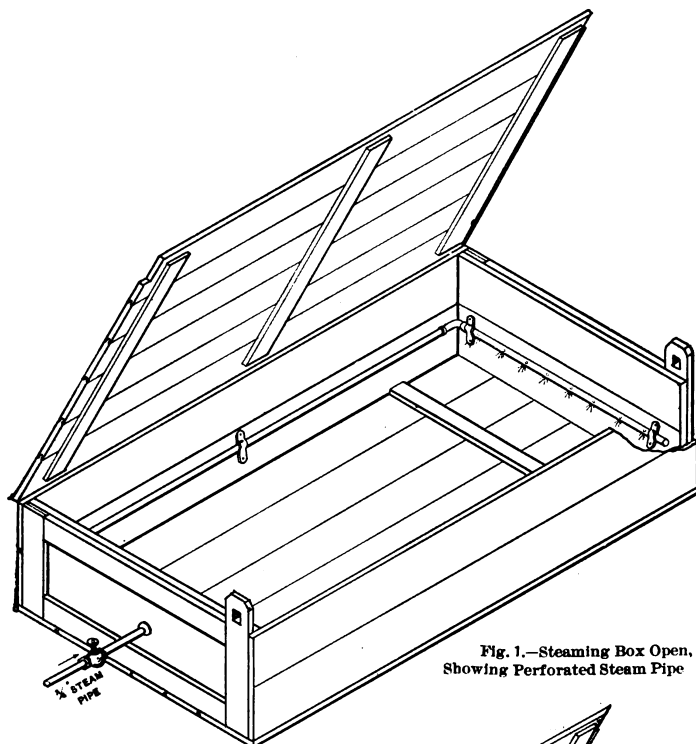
Steaming Box Open, Showing Perforated Steam Pipe
